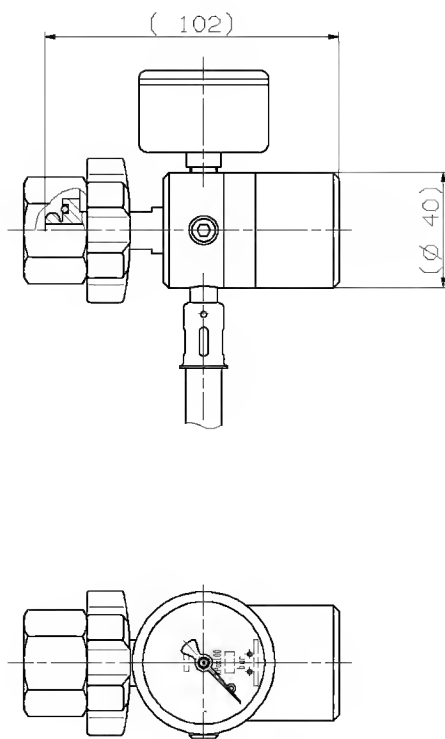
Pressure regulator with screw-threaded high-pressure connection
